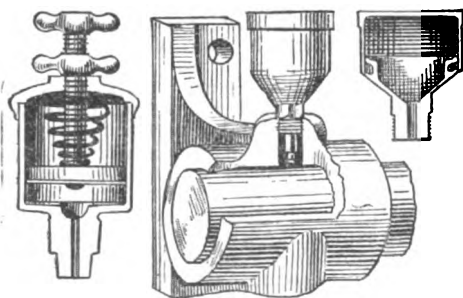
Spring-equipped grease cup (left); ordinary grease cup in section and on a bearing (right)
